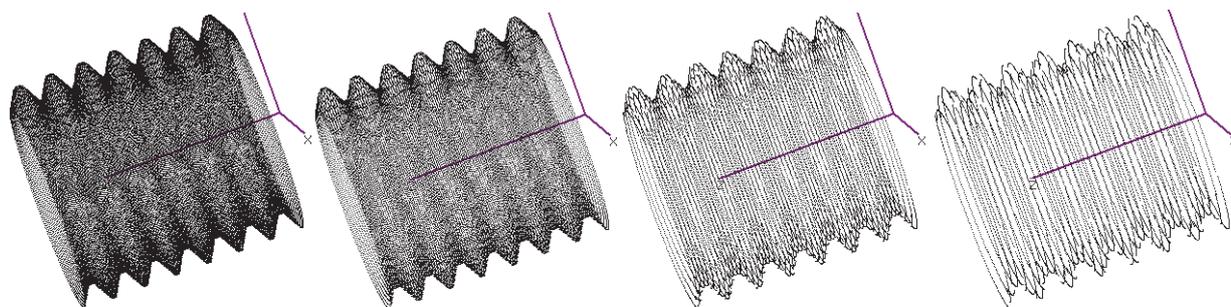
Points of the thread surface: 65 000, 43 000, 22 000, 13 000
